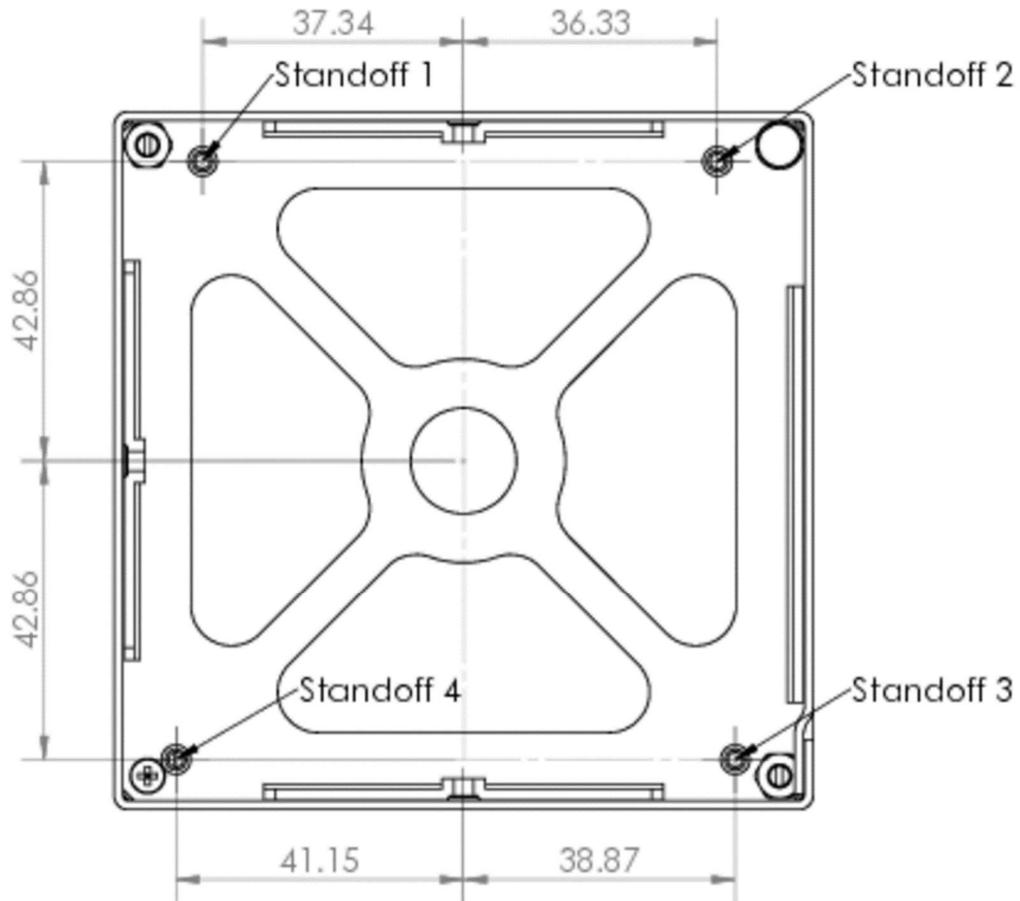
Standoff Mounting Dimensions - Chassis (mm)
